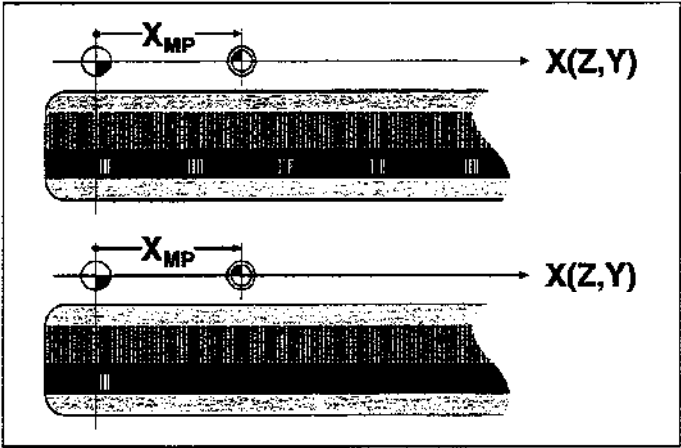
Scale reference point \oplus and machine datum \odot on scales with one or more reference marks.
